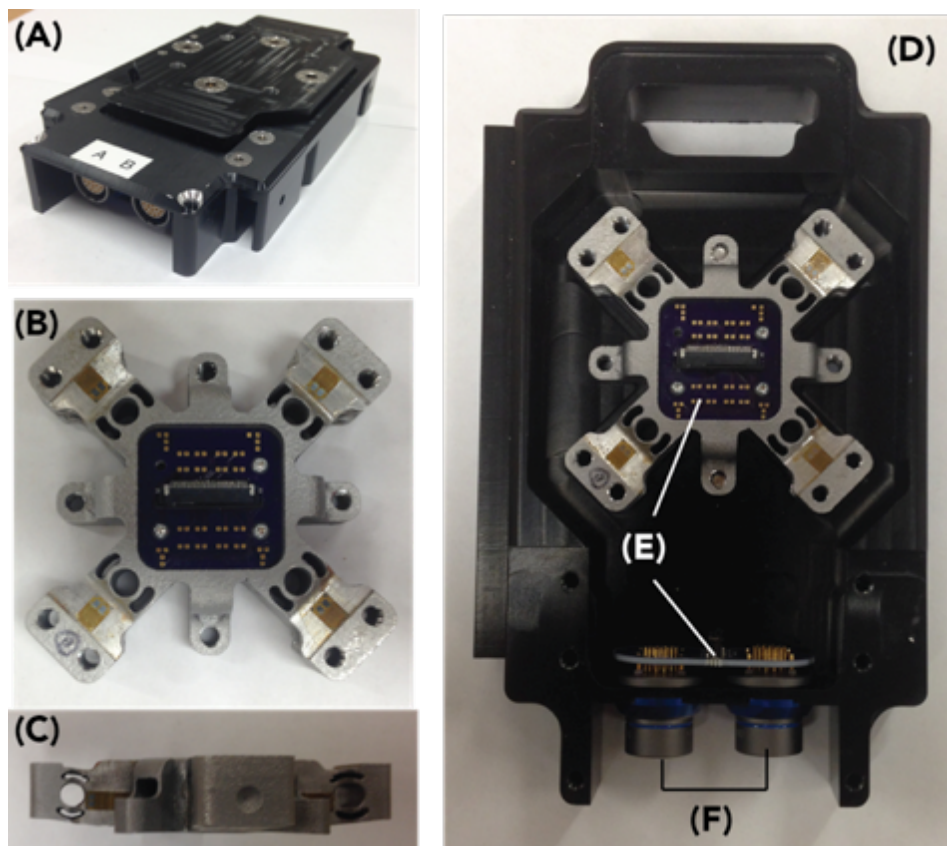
(A) Assembled sensor including the IP-66 housing. (B) Top view of sensor body with strain gages and center PCB installed. (C) Side view of sensor body with strain gages installed. (D) Sensor body in the base housing with the interconnecting PCBs (E) and IP-67 receptacles.
